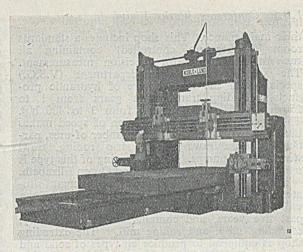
13-ft. wide Planing Machine manufactured by Noble & Lund, Limited, weighing about 135 tons.
